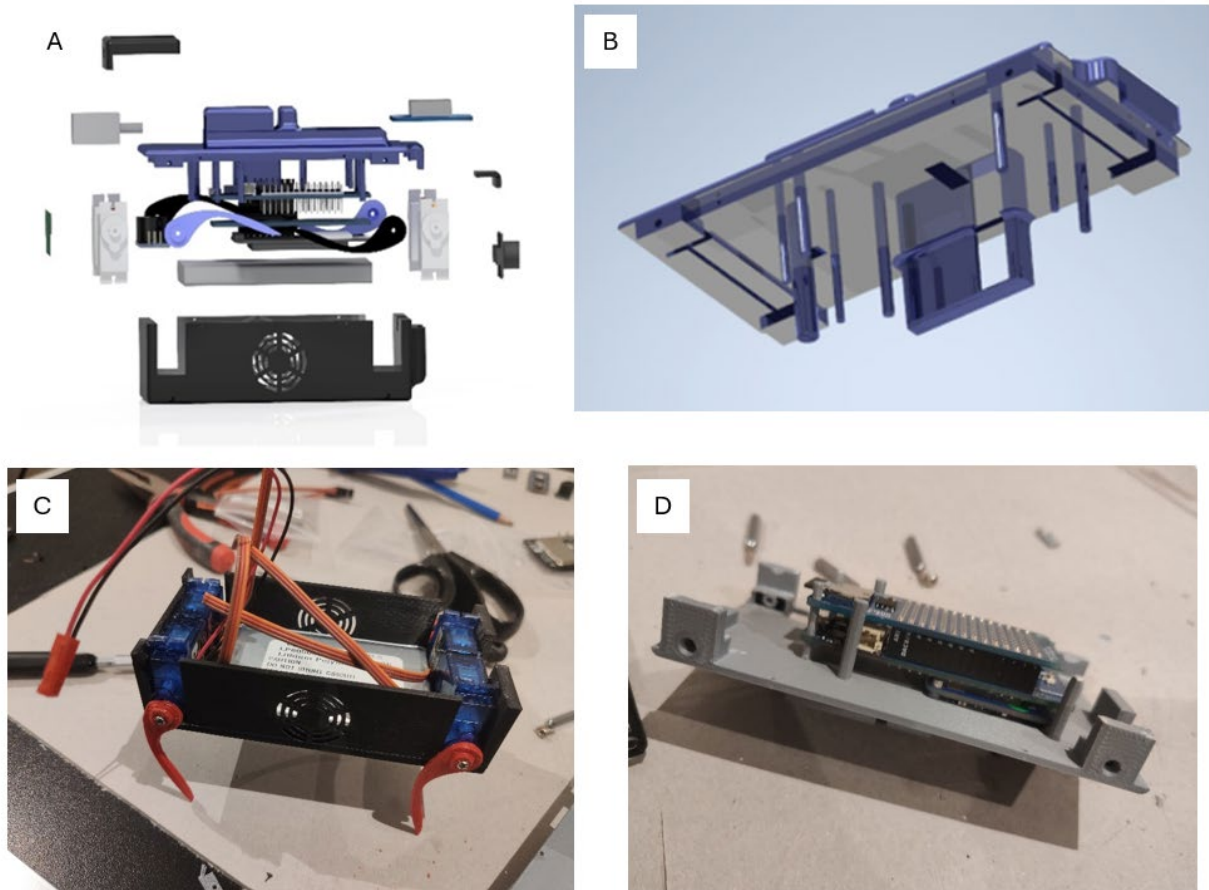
A. RU 3D model in explode view B. Rover cup 3D model, C. RU base assembly with motors and battery, D. RU cup assembly with the boards
